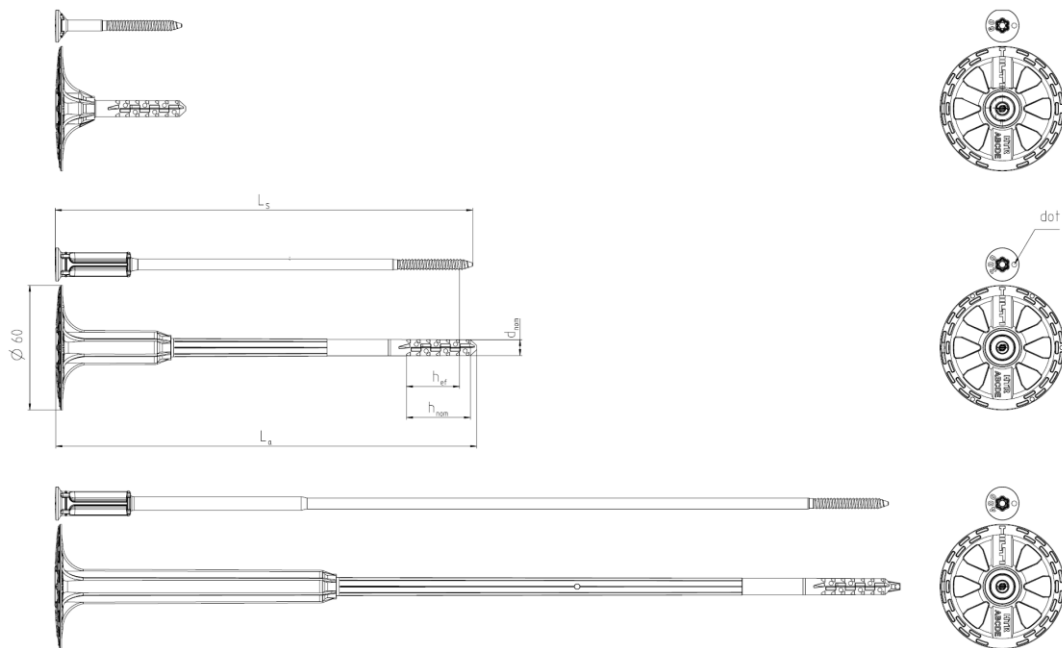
HTR-M - assembled sleeve, plate and composite screw
